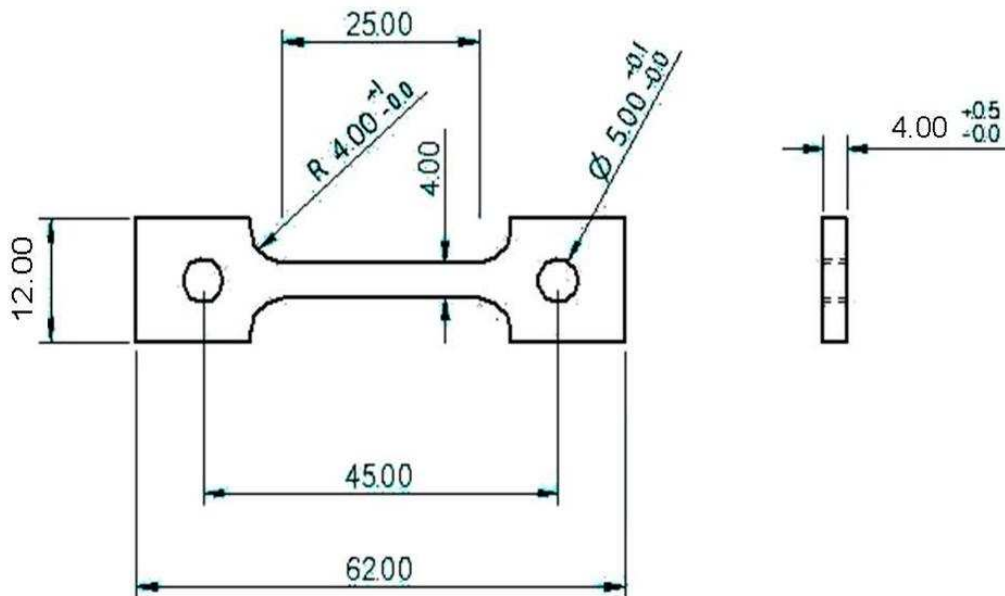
Tensile specimens with dimensions in mm machined from plates.
